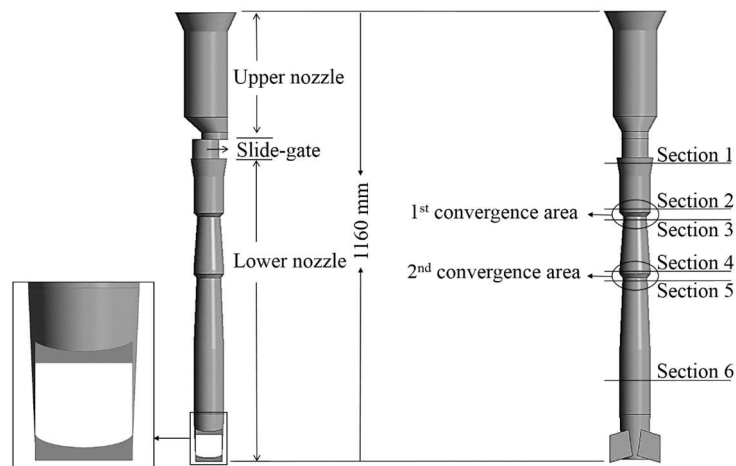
A schematic view of the nozzle and locations of cut cross sections.
